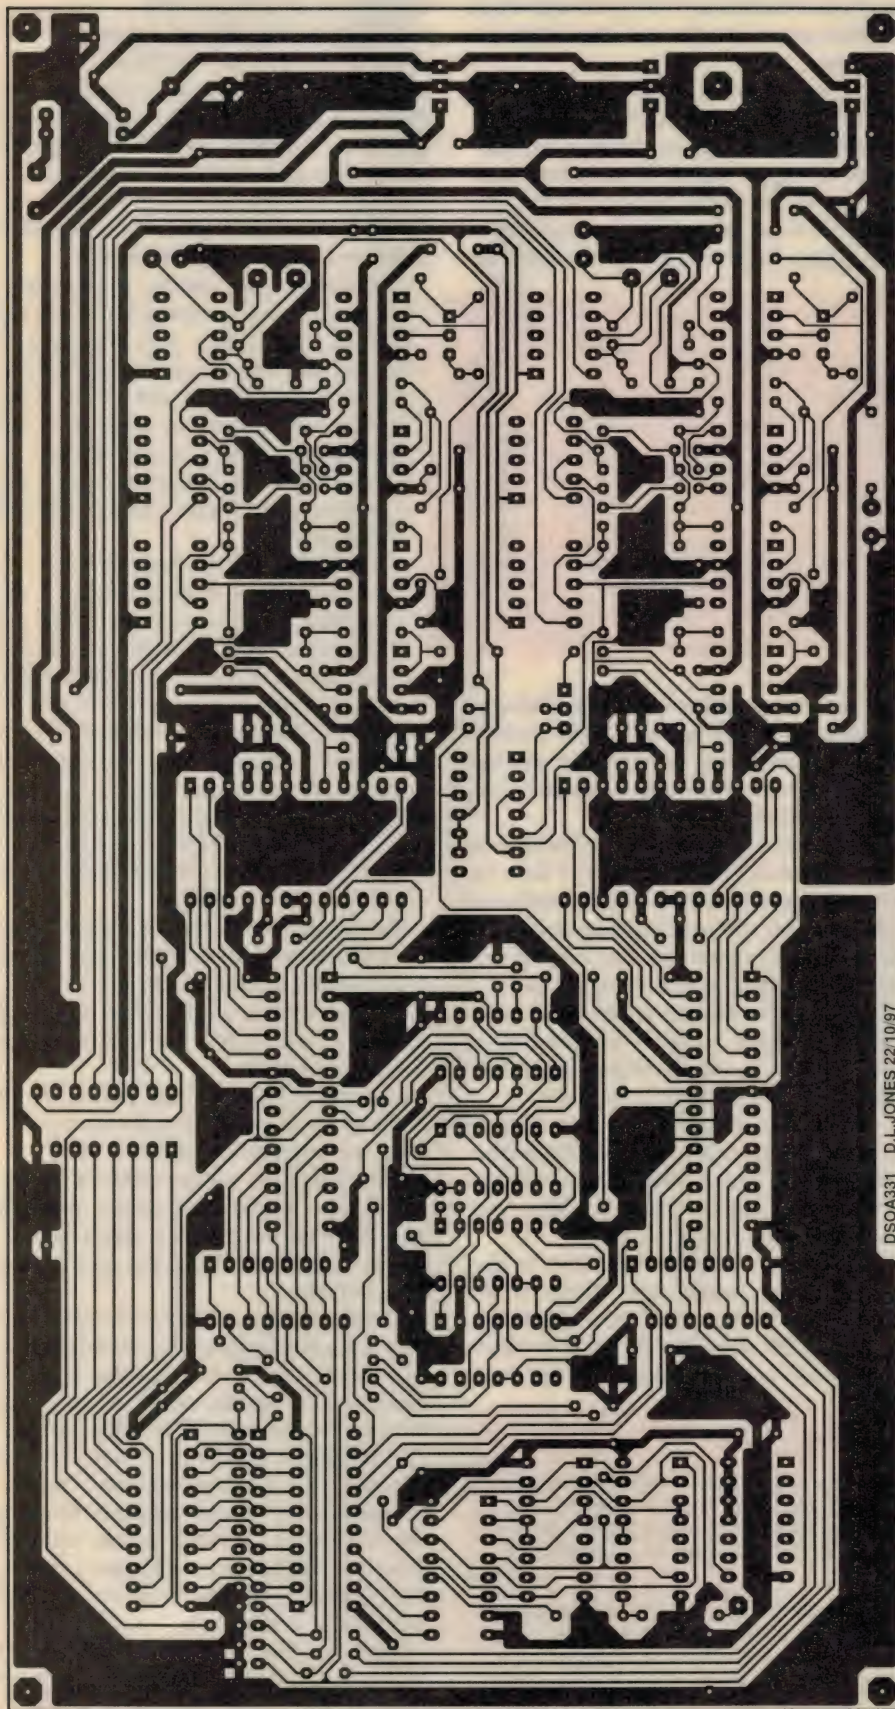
(below) and Fig.4 (right): The PCB copper and front panel artwork for the DSO Adaptor, which can be used to make your own unit. Both are shown here actual size.
